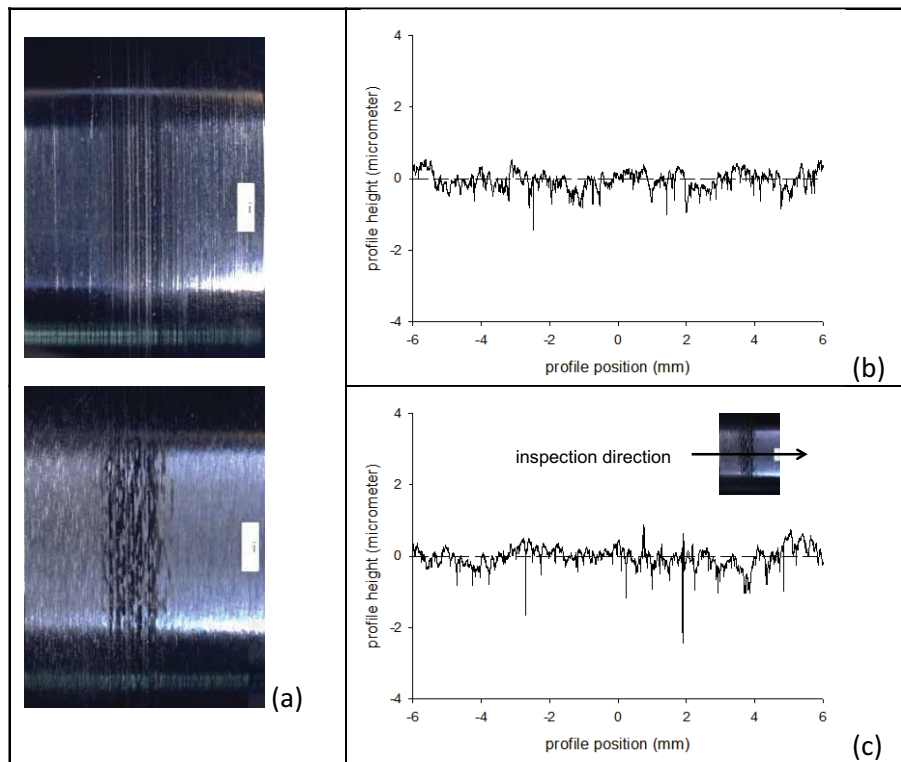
Data from Configuration 10. (a) Conditions of rollers, end of test. (b) Profilometer inspection, lower roller, start of test. (c) Profilometer inspection, lower roller, end of test.
